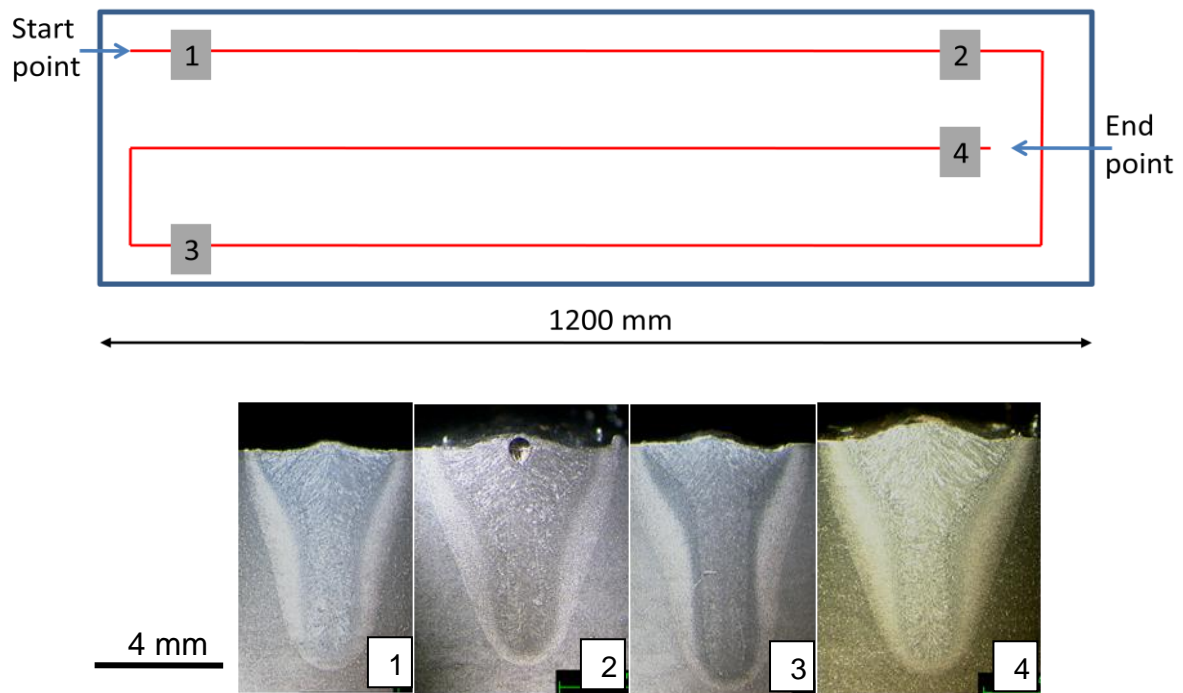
Welding path and macrographs from different sections of long weld achieved at 1 m min^{-1} travel speed and 5 kW of power (welding times: 1 - 3 sec; 2 - 65 sec; 3 - 137 sec; 4 - 209 sec).
